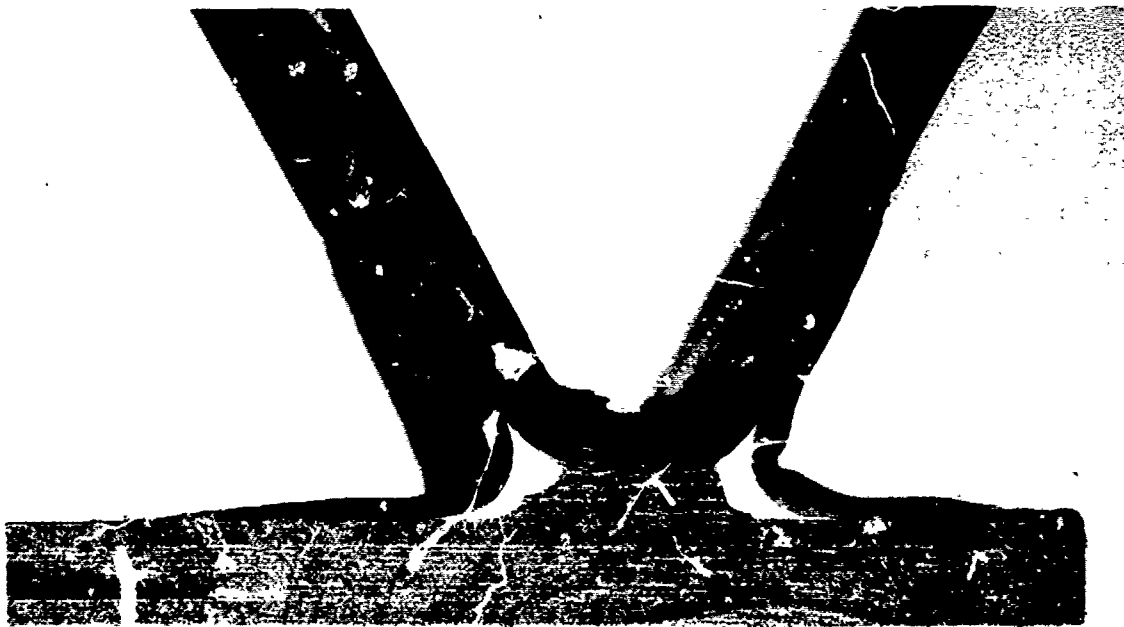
BONDED TRUSS SPECIMEN, GRAPHITE TO BORON END JOINT
